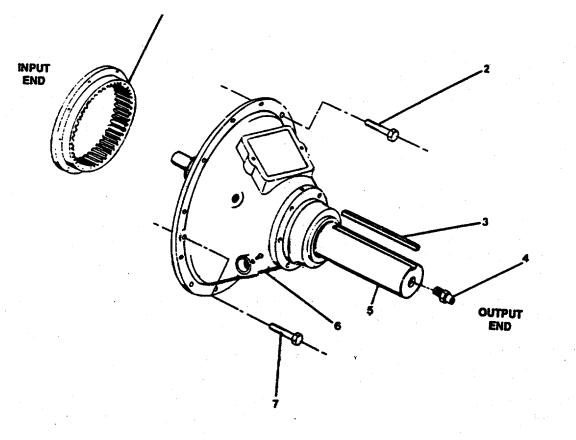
Friction Clutch Assembly (SP-214-P1).
